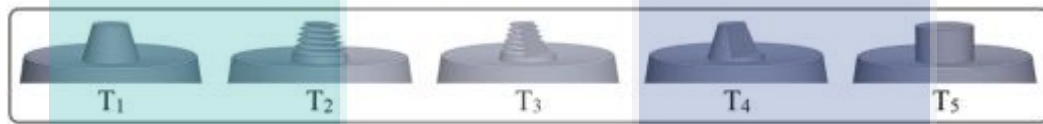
The five tools used to perform the weldments in 3-D view.
